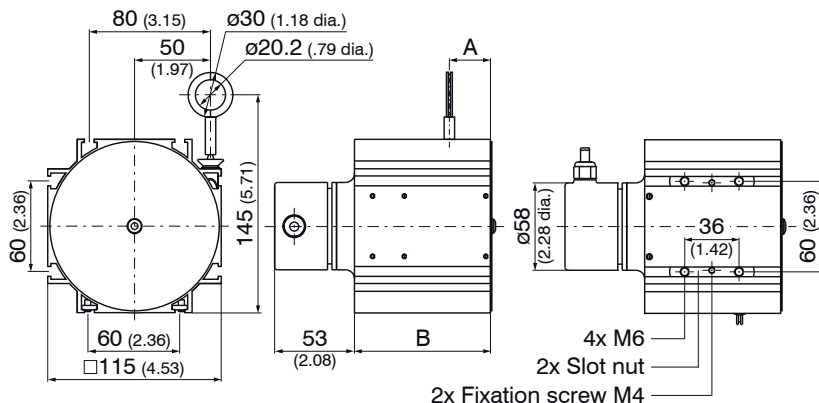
Dimensional drawing WDS- ... - P115 - HTL/TTL, dimensions in mm (inches), not to scale
